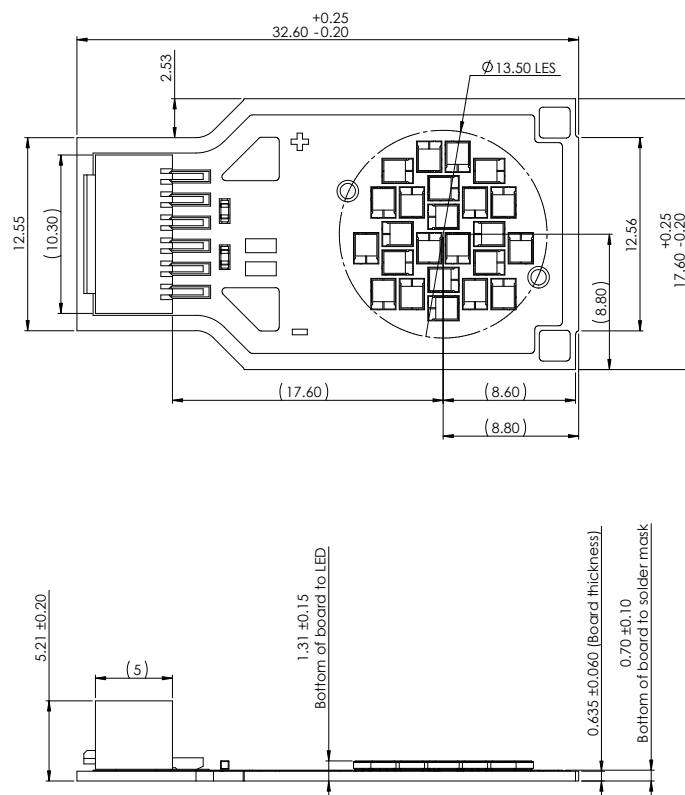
Package outline drawing for LUXEON S3000/LXSx-PWxx-0024.
